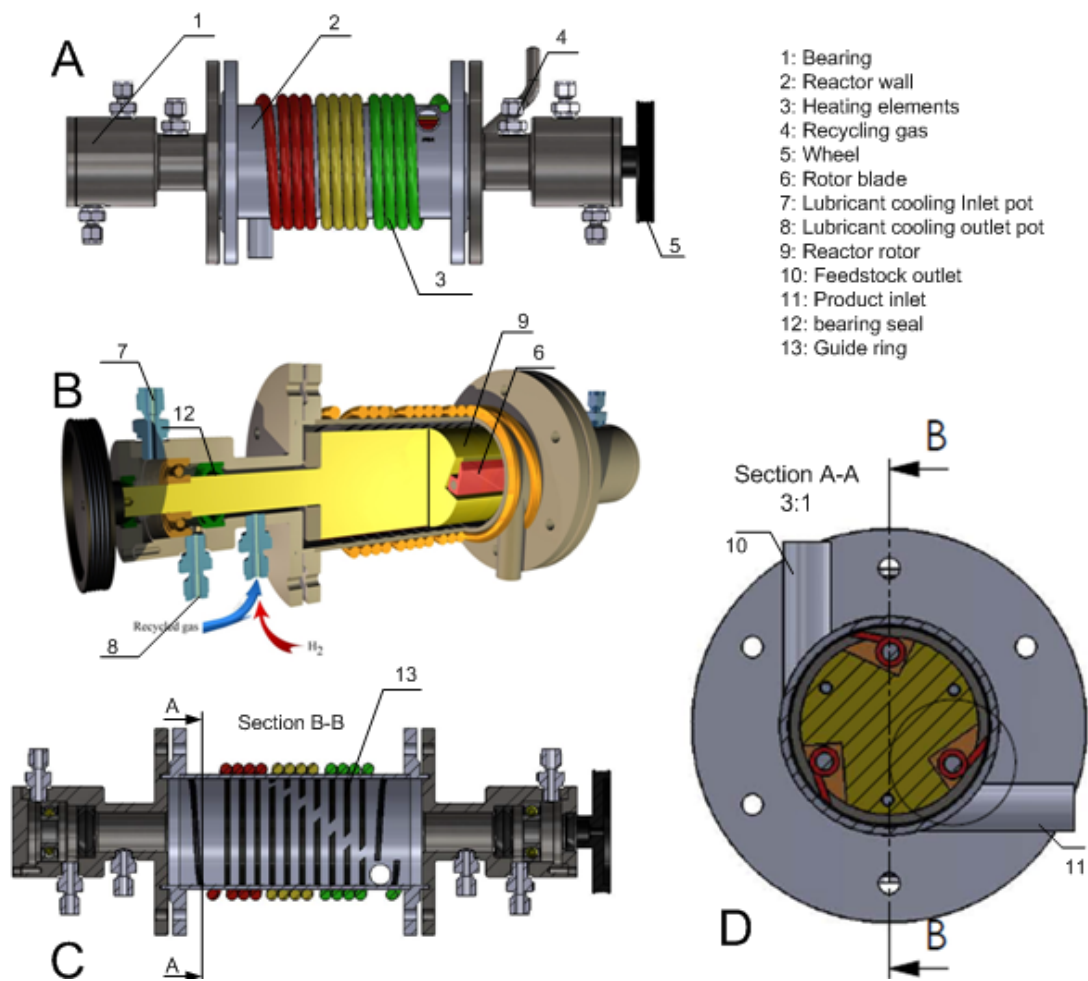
Figure 4: Modified pyrolysis centrifuge reactor drawing removed insulation (A: overview of PCR reactor, B: cut-view of reactor, C: cut-view of reactor without rotor (front view), D: cut-view of reactor (side view))
